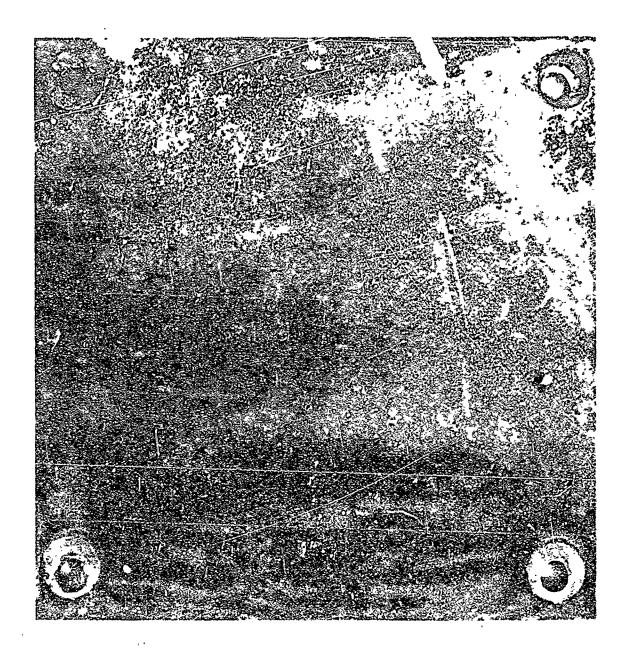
Coating Specimen RSA 64-14-A After Test No. 1
